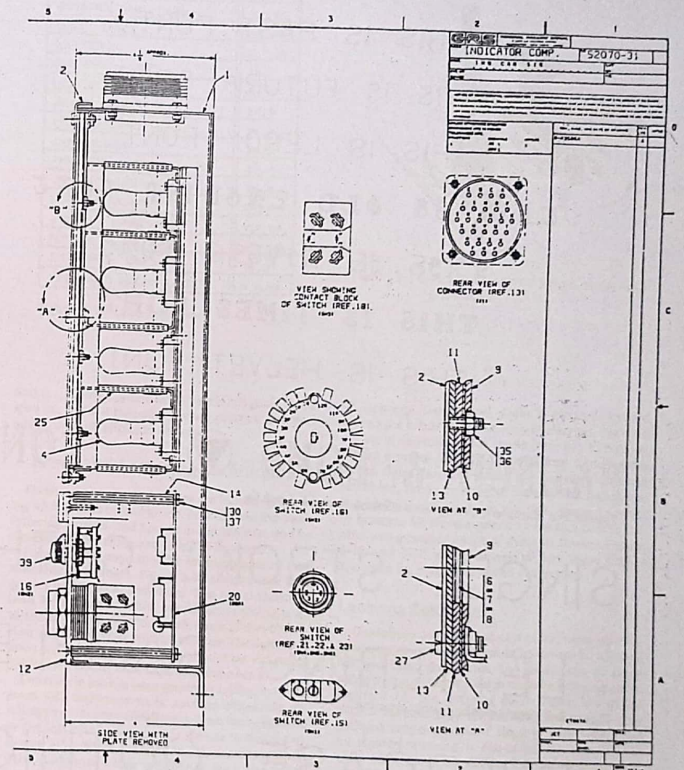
Examples of text on a technical drawing (Courtesy General Railway Signal)
